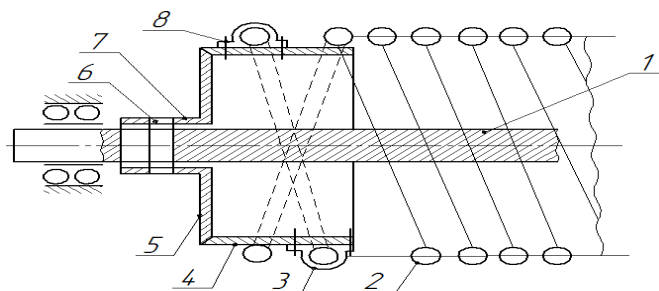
Arrangement of node A: 1-shaft; 2-spring; 3-bracket; 4-cup; 5-disk; 6-pin; 7-bushing; 8-bolts tightening the wire bracket to the cup.
